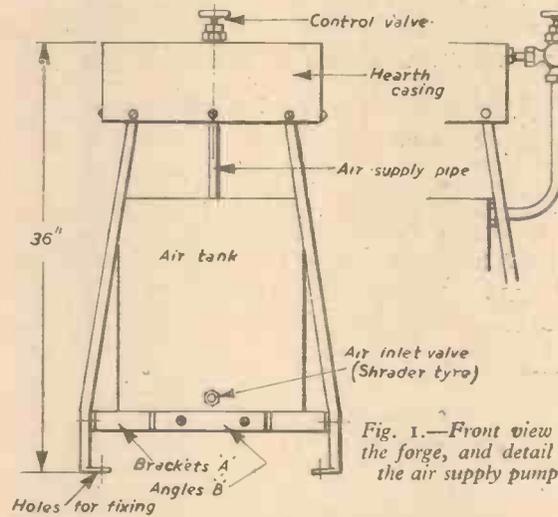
Front view of the forge, and detail of the air supply pump.
